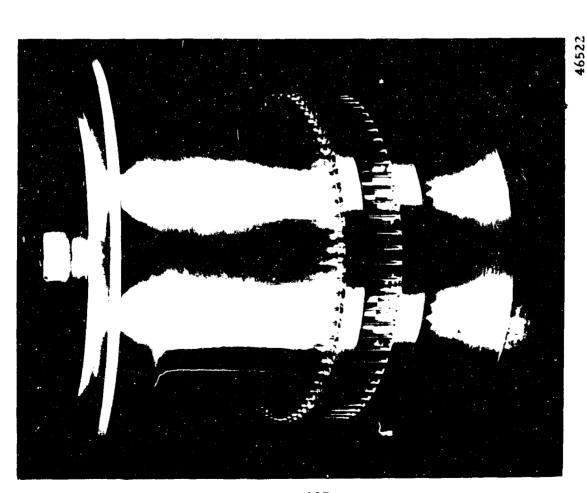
16-INCH, 100-PSI ALUMINUM TEST ASSEMBLY
